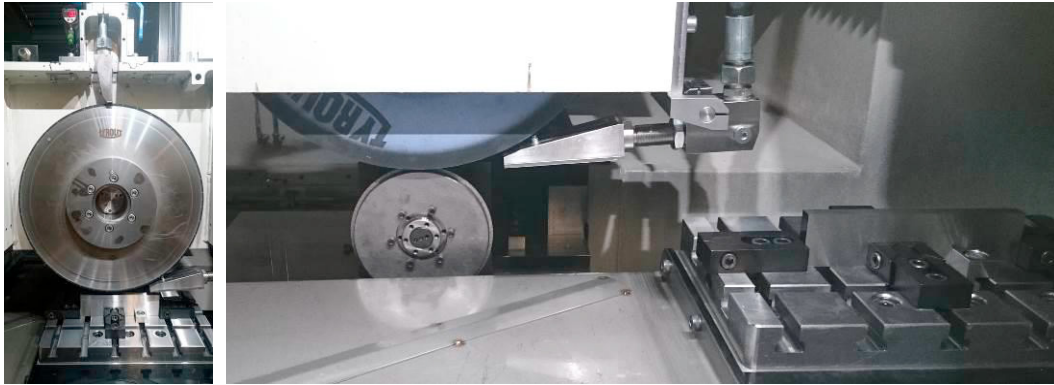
Setup for the grinding tests with CBN steel wheel (left) and with Al₂O₃ wheel in dressing position (right)
